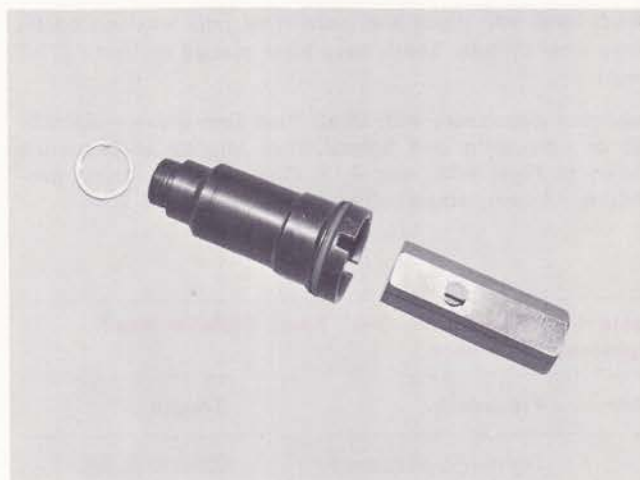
Spark plug adapter with ST-890 Wrench
